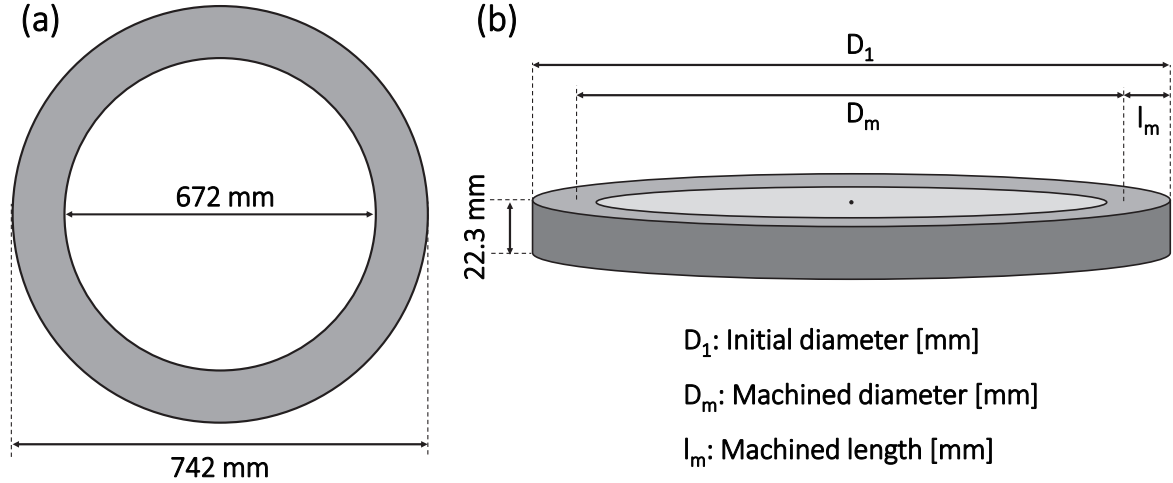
Dimension of the Alloy 718 workpiece used in the turning tests.
